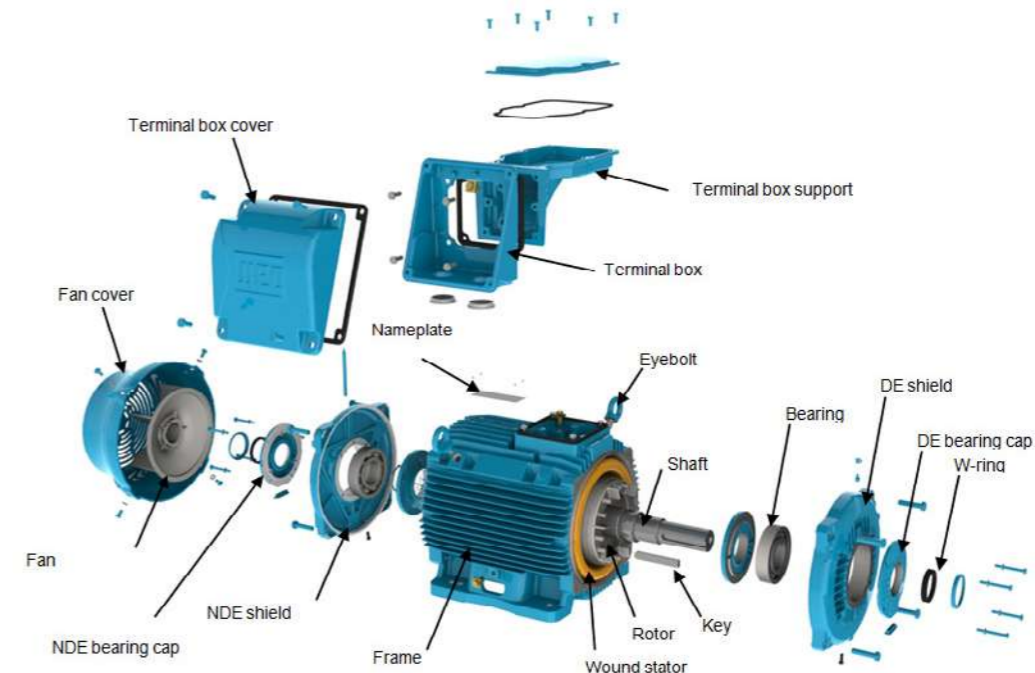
Exploded view of the components of a motor with the type of protection "ec".
